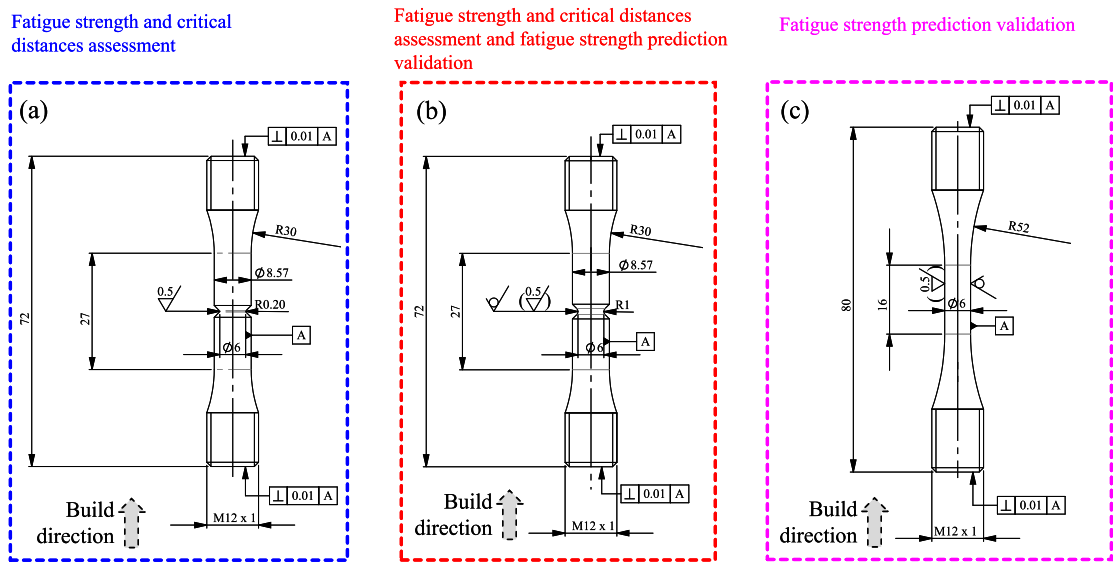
Geometries and dimensions (in mm) of the 3D printed specimens involved in the research: (a) machined sharp V-notched specimen, (b) machined and as-built blunt V-notched specimen and (c) machined and as-built plain specimen.
